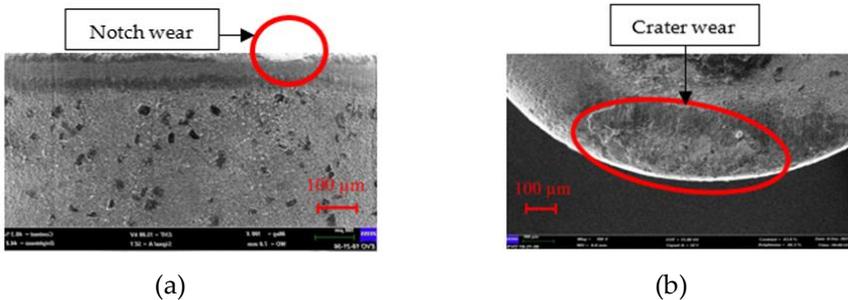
Wear mechanism of (a) front view and (b) top view at 200 m/min V_c and 0.05 mm/rev F_r
